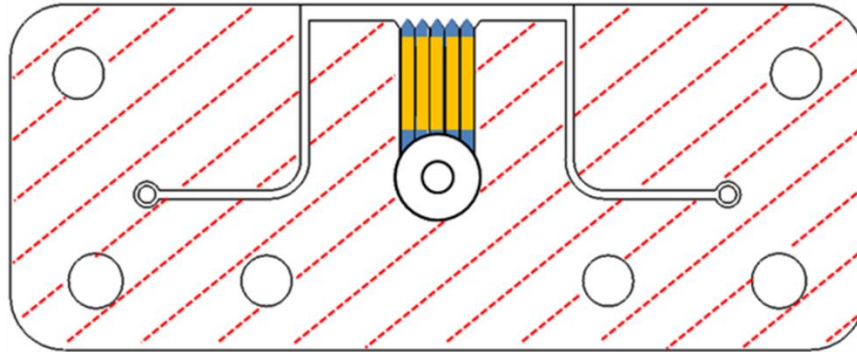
The smallest tools were used first to machine the nozzles. Afterwards the microchannels were machined using larger tools.
